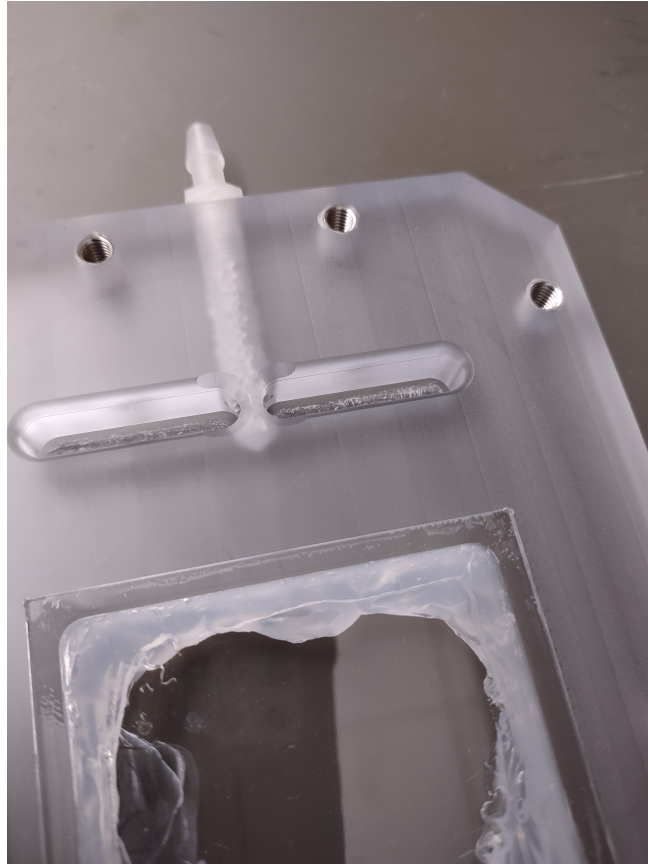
Shows the chamfered areas in the center of the inlet/outlet flow diverter region. This allows for the flow to more smoothly enter the chamber, decreasing the entrance length. Also shown are stainless steel threaded inserts which replace the wing nuts for a lower profile PPFC.
